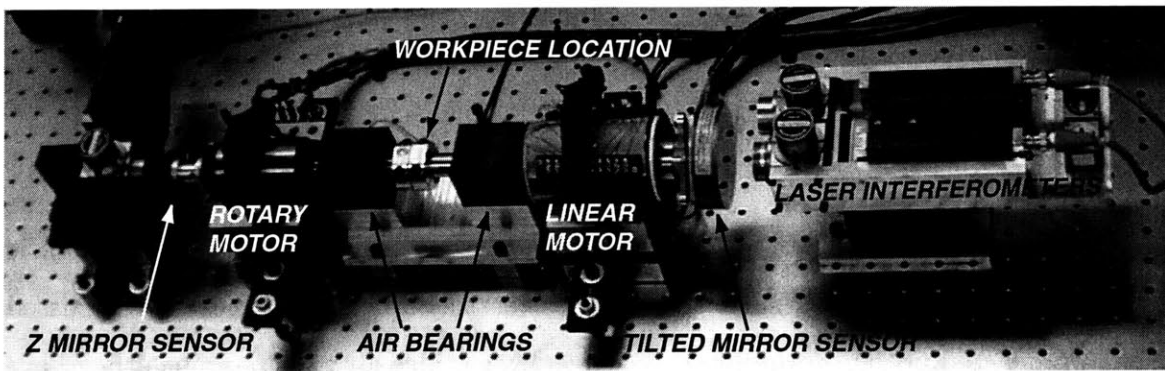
The prototype z - θ axis consists of a central shaft riding in two cylindrical air bearings. A frameless rotary motor on the left generates torque, and the custom-built tubular linear motor on the right generates force. On the far left is a 1 inch (2.54 cm) diameter mirror for z measurement, and on the far right is a 3 inch (7.62 cm) diameter, slightly tilted mirror for θ measurement.
